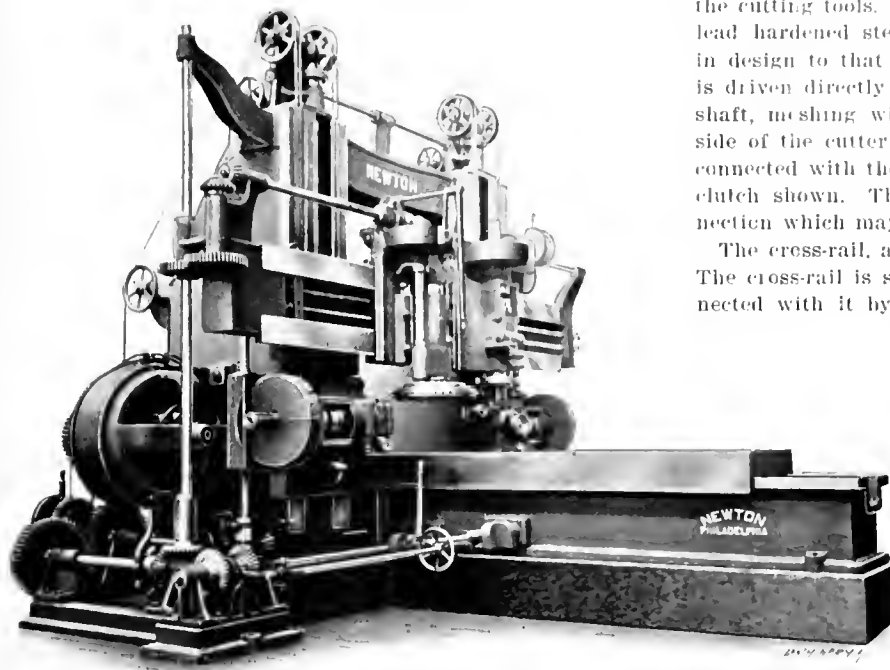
Heavy Four-spindle Milling Machine, built for the Altoona Shops of the Pennsylvania Railroad.
